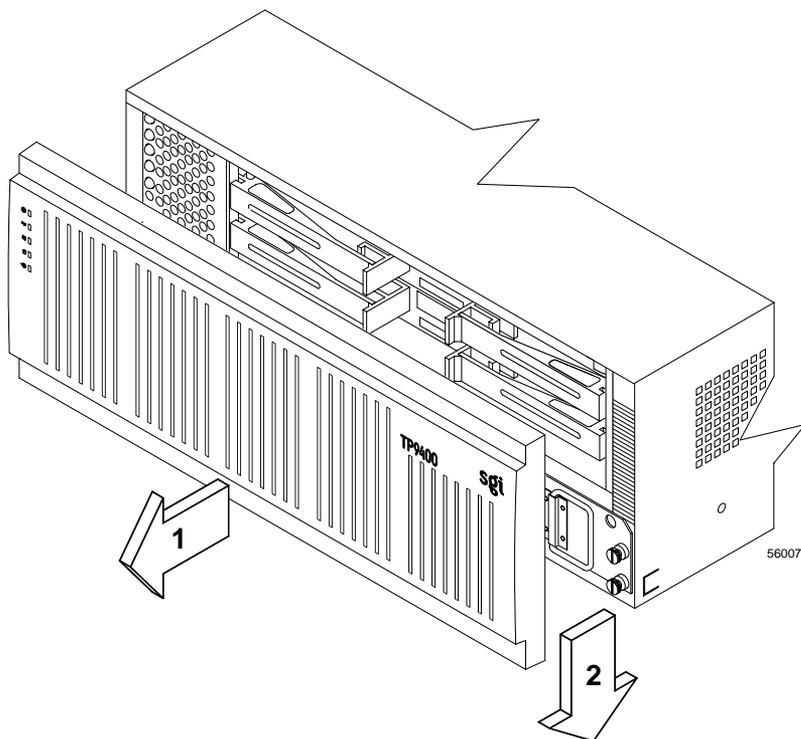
Removing the Front Cover of the Controller Enclosure
